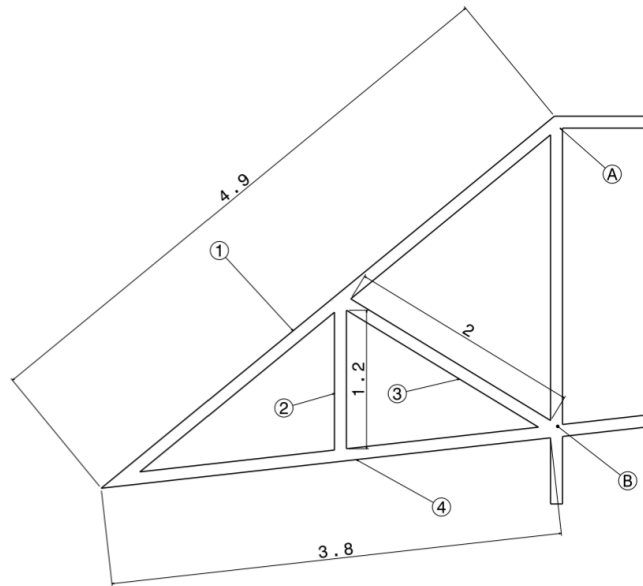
Sketch of the canard supporting structure. The structure is assumed to be fixed at point A and point B. Beams 1 and 2 are supporting beams.
